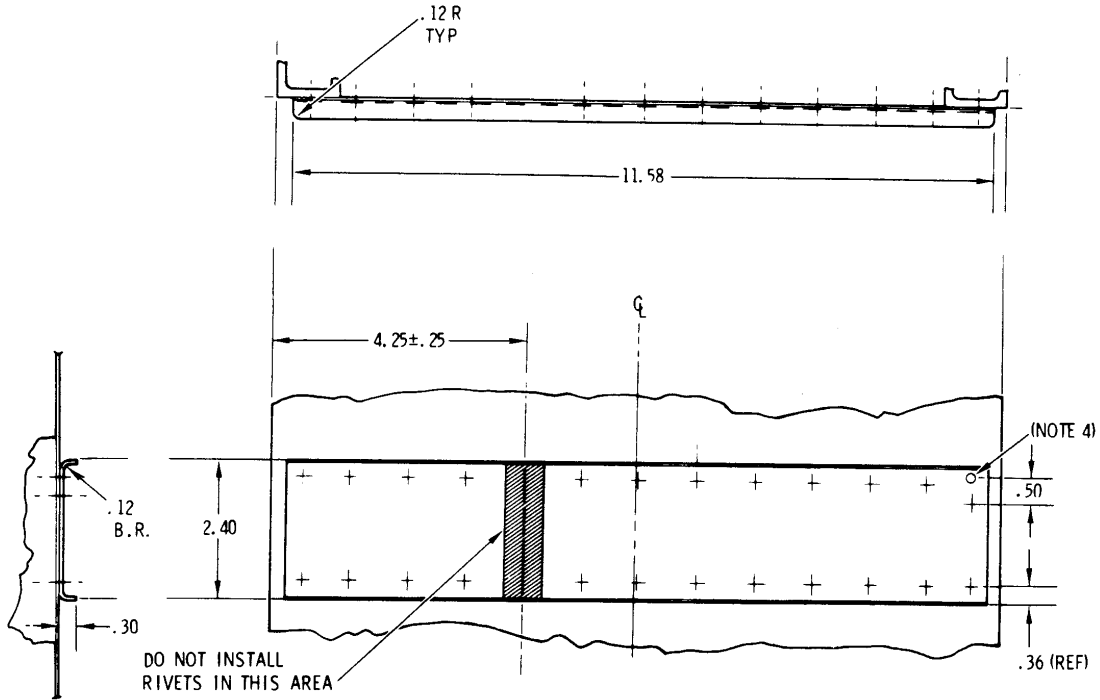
Interference Check and Rivet Removal; Check for Missing Rivets
